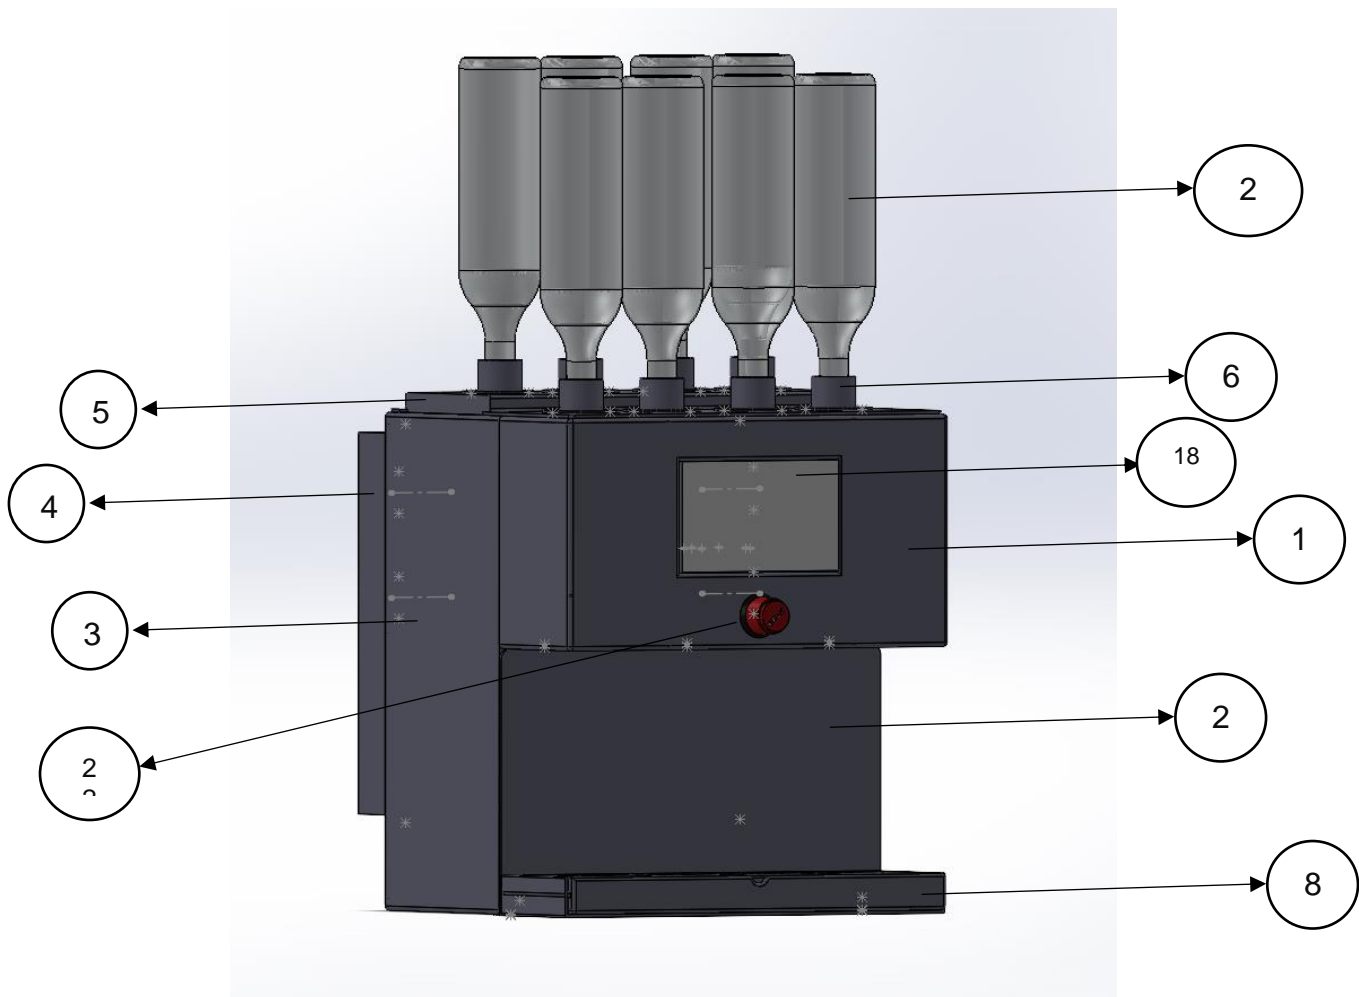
Isometric View of the complete assembly with eight bottles
